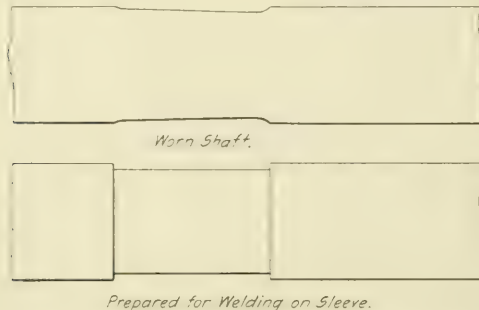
Worn Shaft Which Was Repaired by Oxy-Acetylene Welding.
